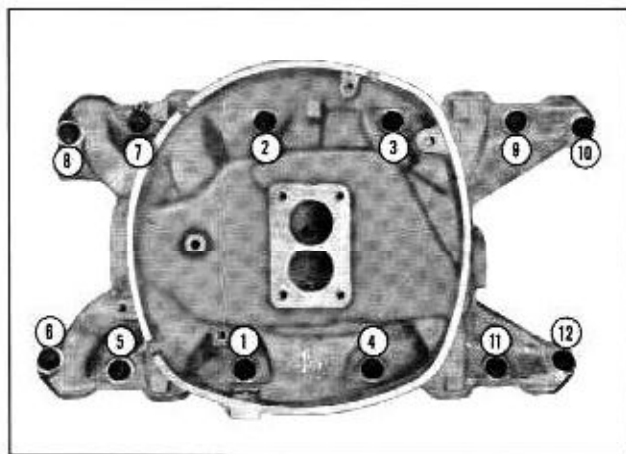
Intake Manifold Bolt Torque Sequence
